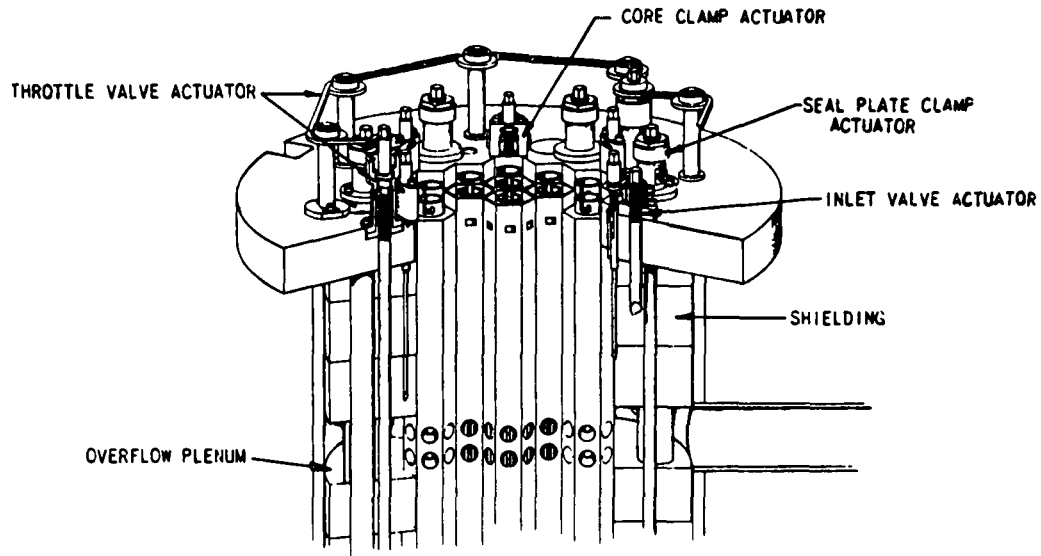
Inner Tank Assembly of EBR-I, Mark III
